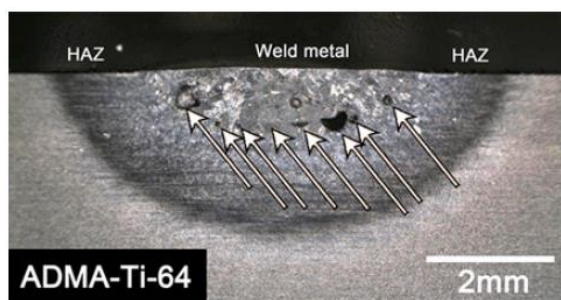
Cross-section of GTA weld of ADMA Ti-6Al-4V plate. [110]
